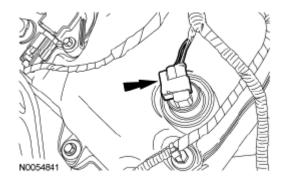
Locating RH Coil-On-Plug Electrical Connectors Courtesy of FORD MOTOR CO.
